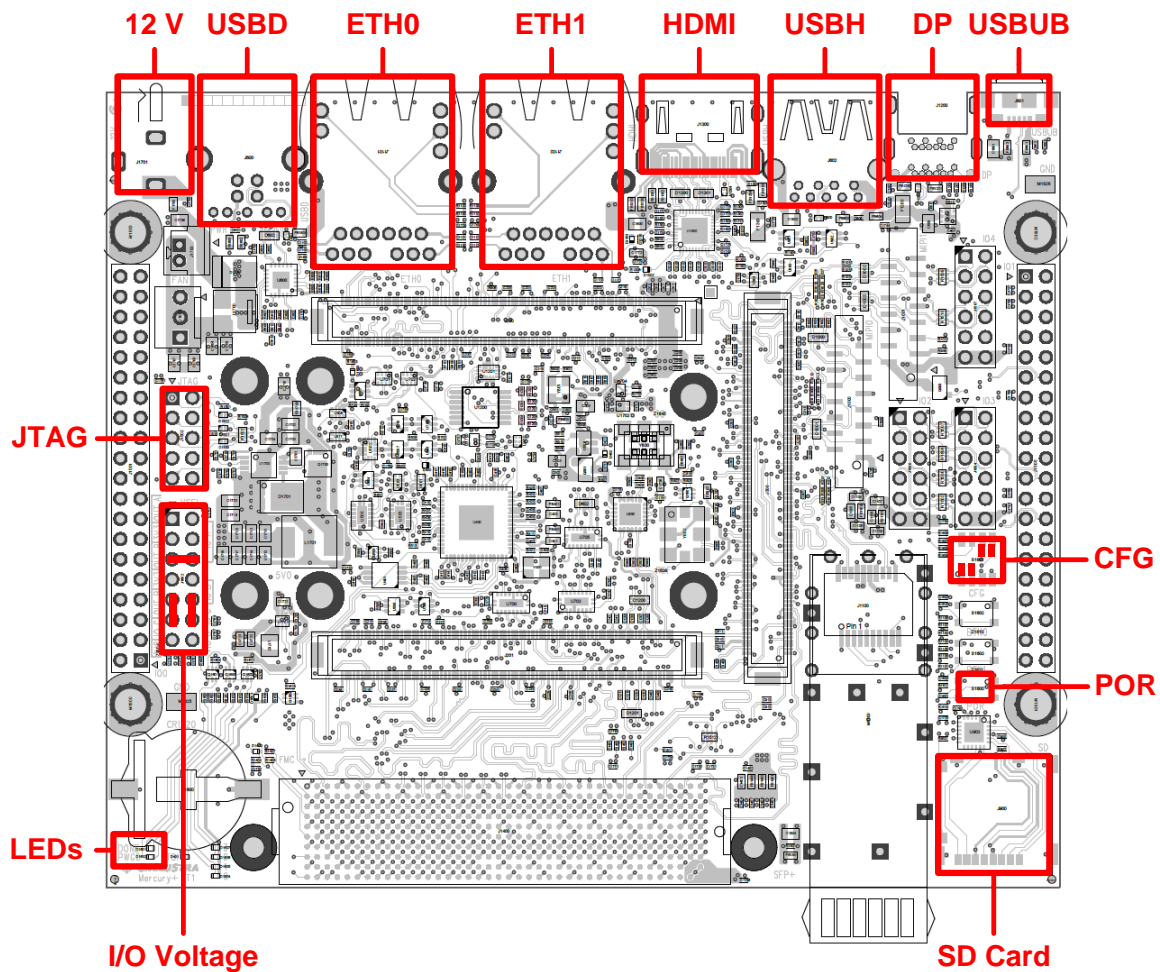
Mercury+ ST1 base board assembly drawing (top view)
